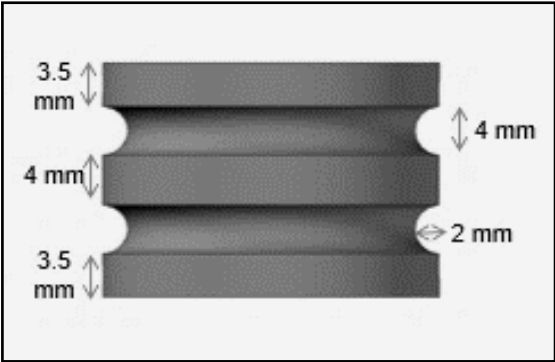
Grooved Head dimensions (Specimen - G2L19)
